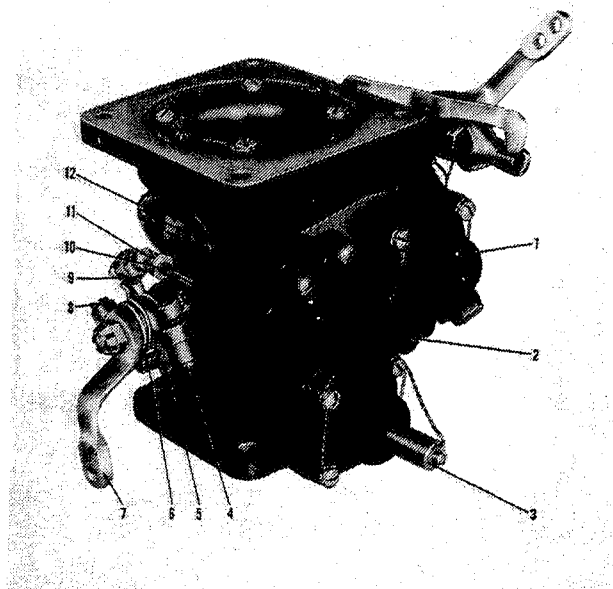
THREE-QUARTER, LEFT REAR VIEW OF STROMBERG PSD-5C CARBURETOR.
